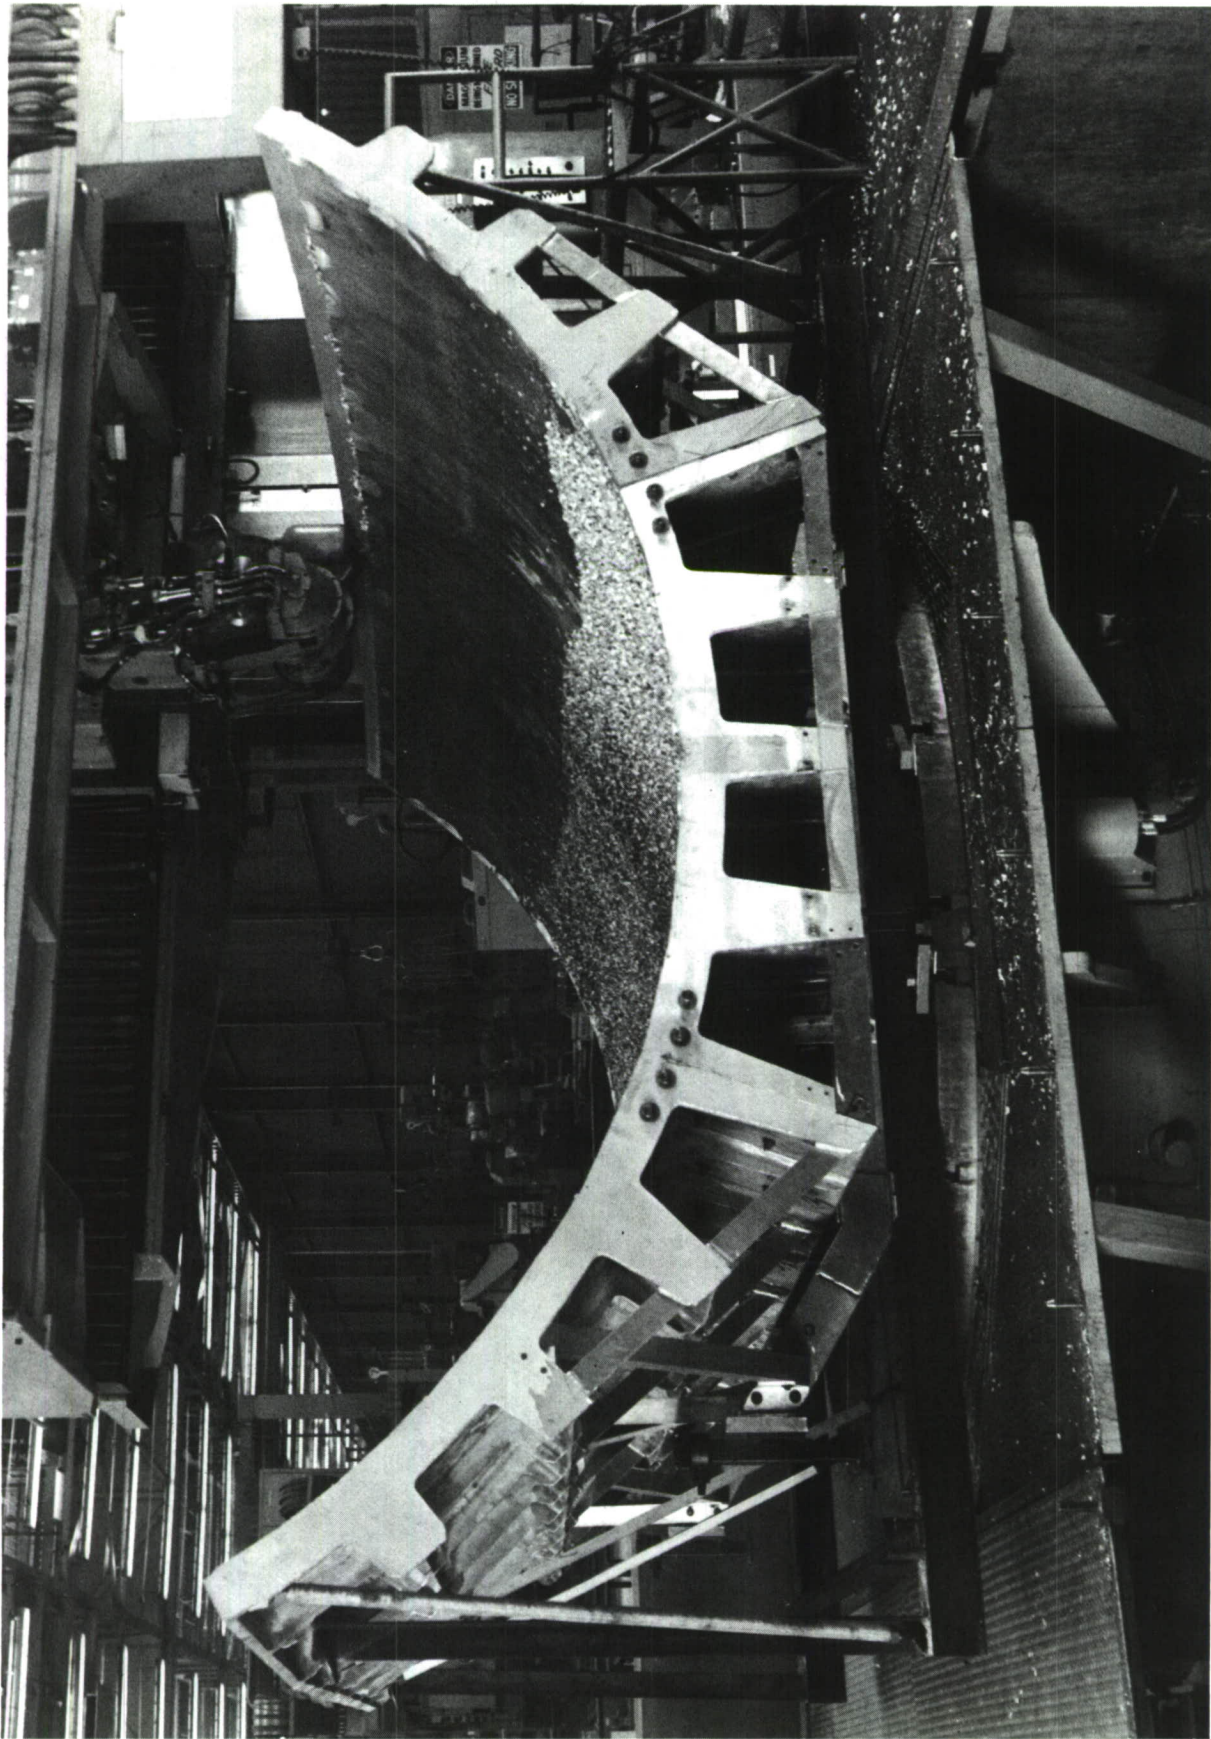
Three-Piece Cast Aluminum, Compound Contoured Bonding Assembly Jig (Machined on Five-Axis Mill)
